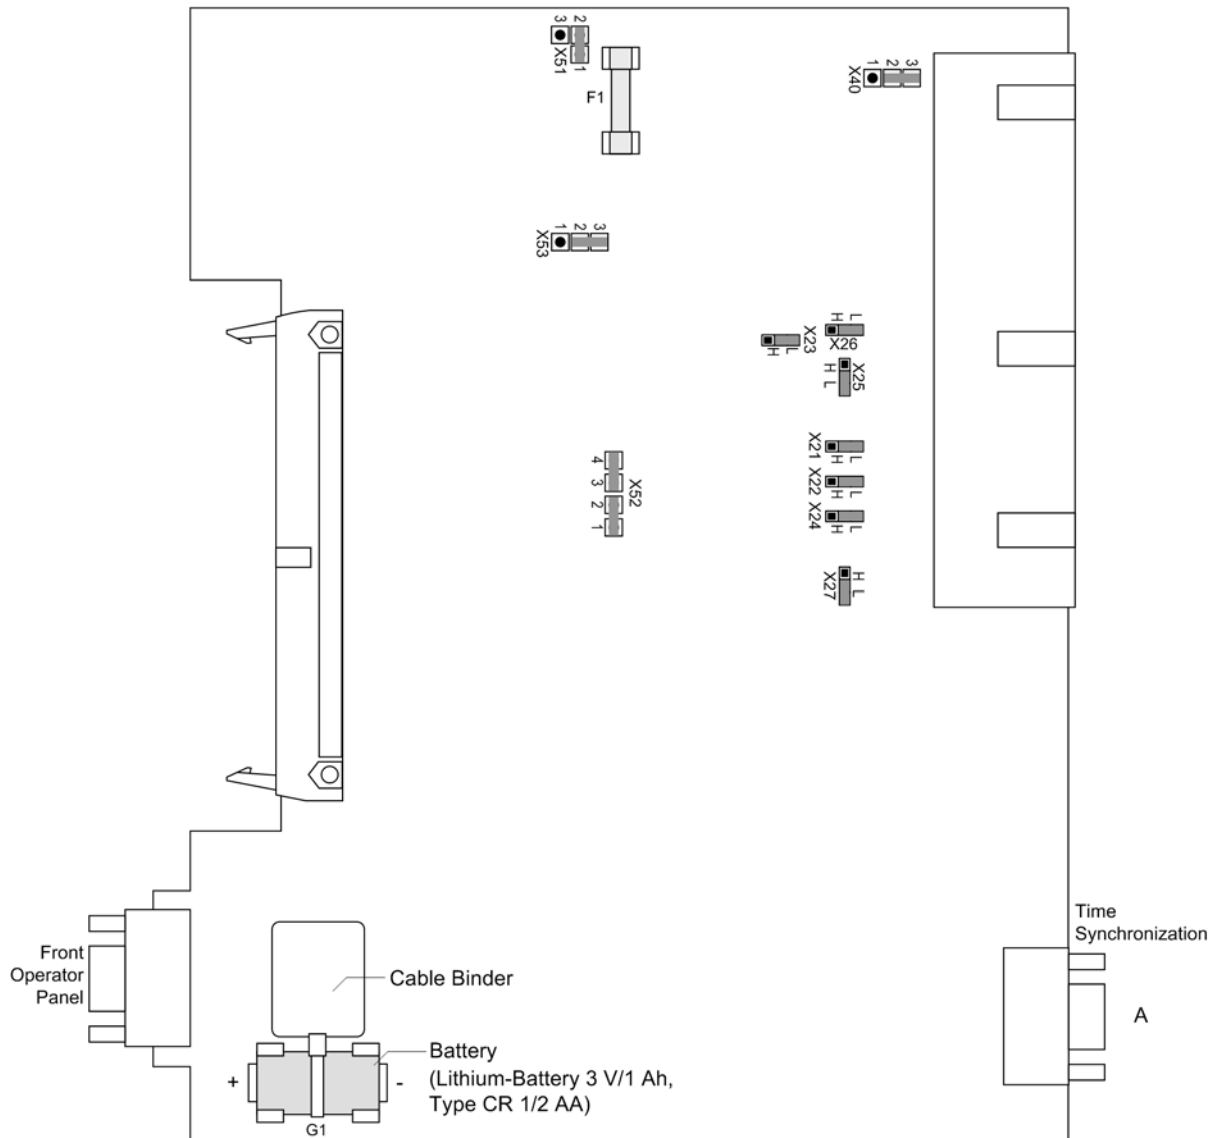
Processor printed circuit board B-CPU for devices .../EE and higher with jumpers settings required for the board configuration
